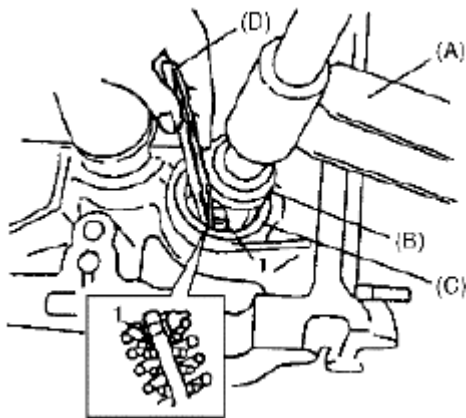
Compressing Valve Spring & Fit Two Valve Cotters Into Groove In Valve Stem
